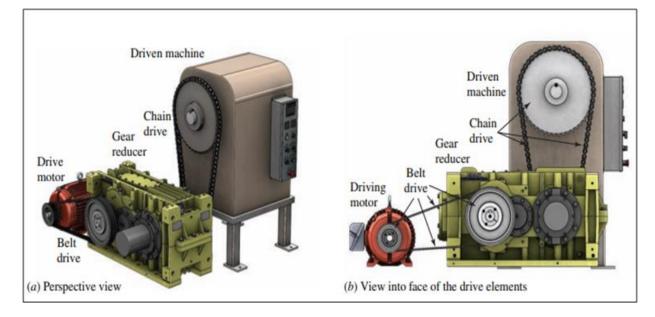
Drive system for an industrial application employing a belt drive, a gear reducer, and a chain drive [1].
